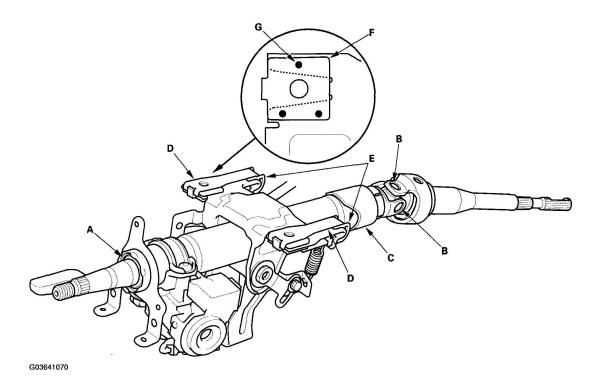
Identifying Steering Column Components Courtesy of AMERICAN HONDA MOTOR CO., INC.
